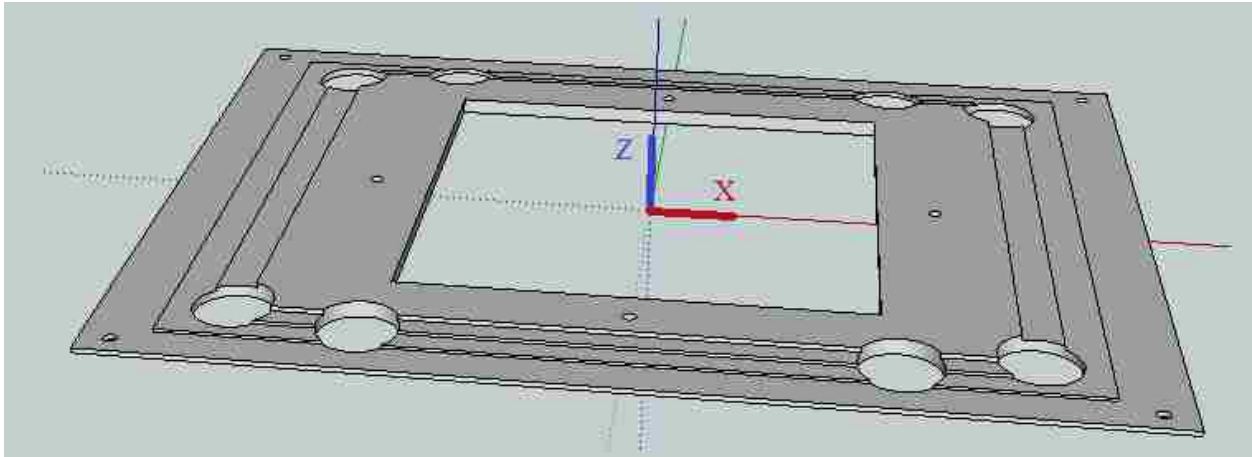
Top orthogonal view of the 10x10 cm² upper trimmer lead plate.
